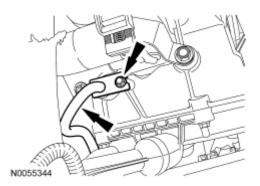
Identifying Transmission Fluid Cooler Tube Bolt Courtesy of FORD MOTOR CO.
